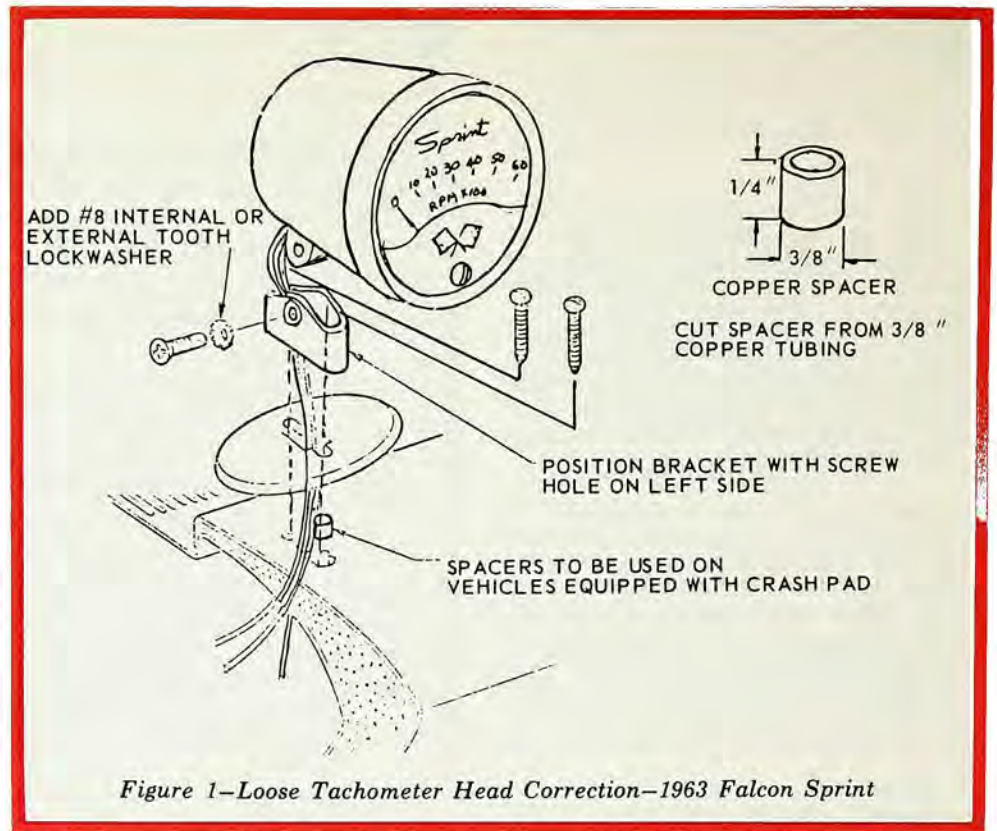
Loose Tachometer Head Correction—1963 Falcon Sprint
